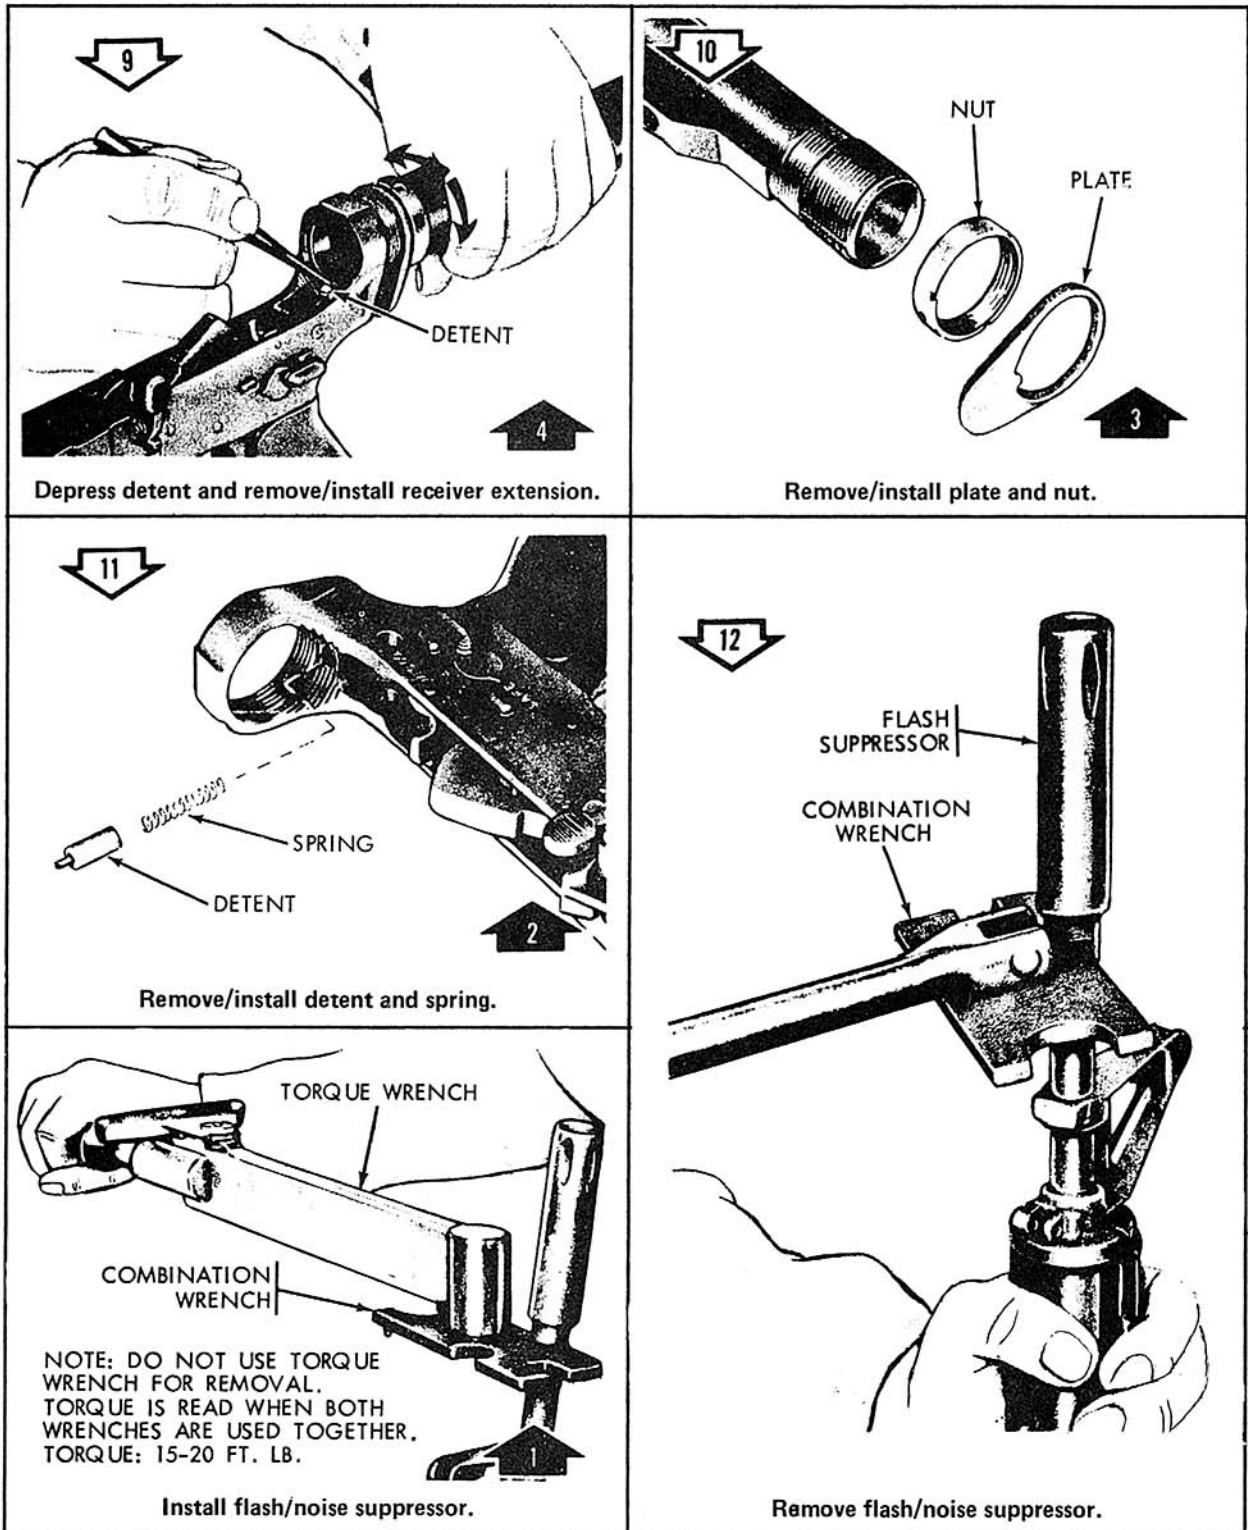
Disassembly/Assembly of the Commando Submachine Gun.
